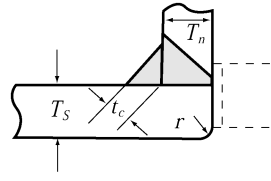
Examples of Welded Joints (continued)
